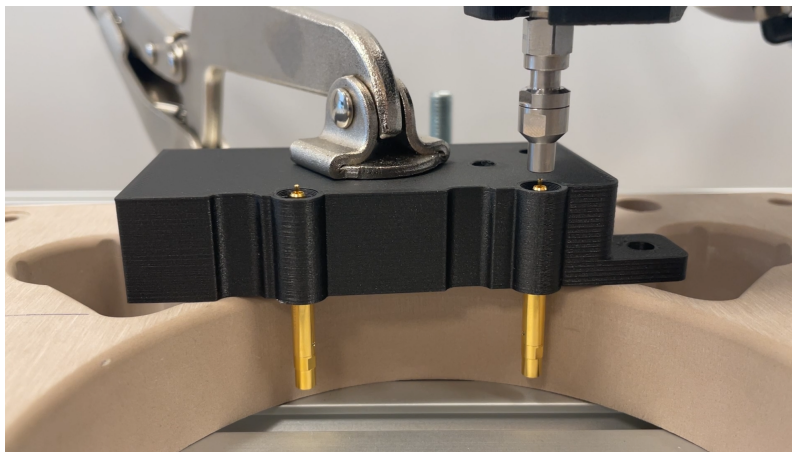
Setup for Test 5, containing 3D-printed fixture and two spring-loaded coaxial probes.
